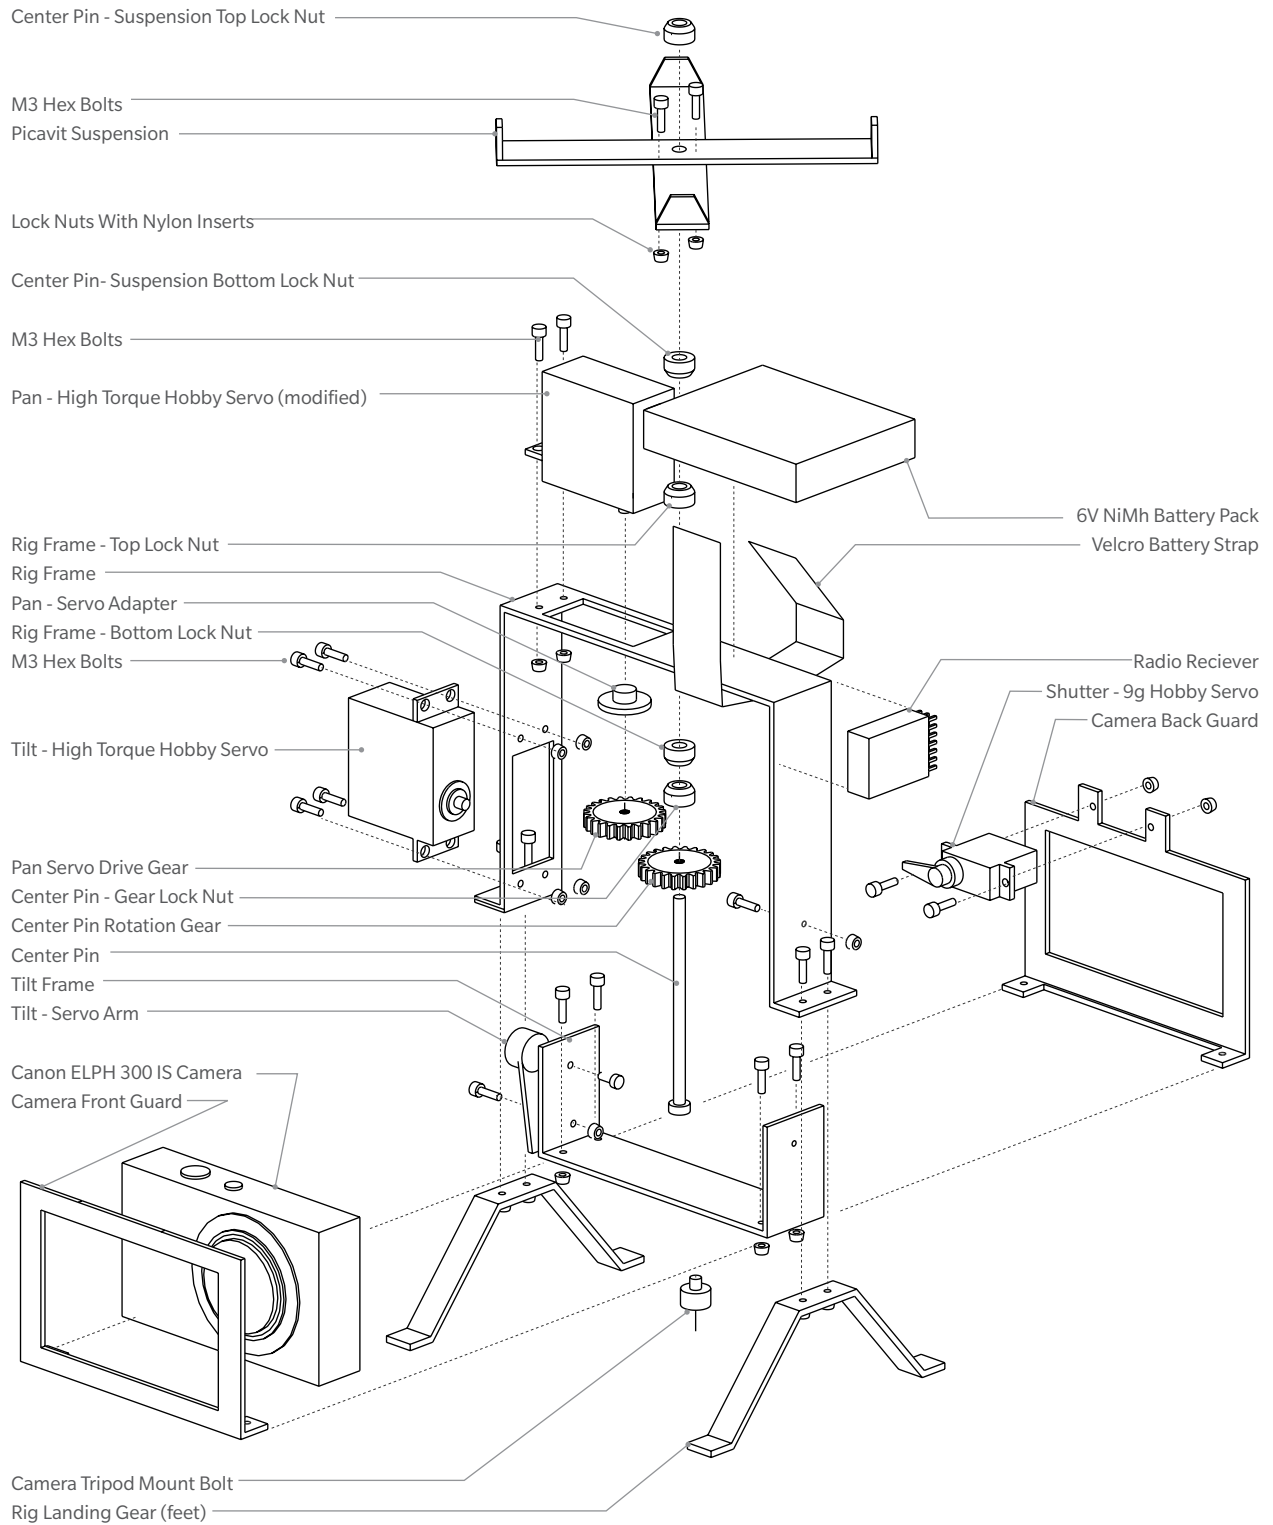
Kite Rig-03 Exploded Axonometric. *Drawing by Author.
